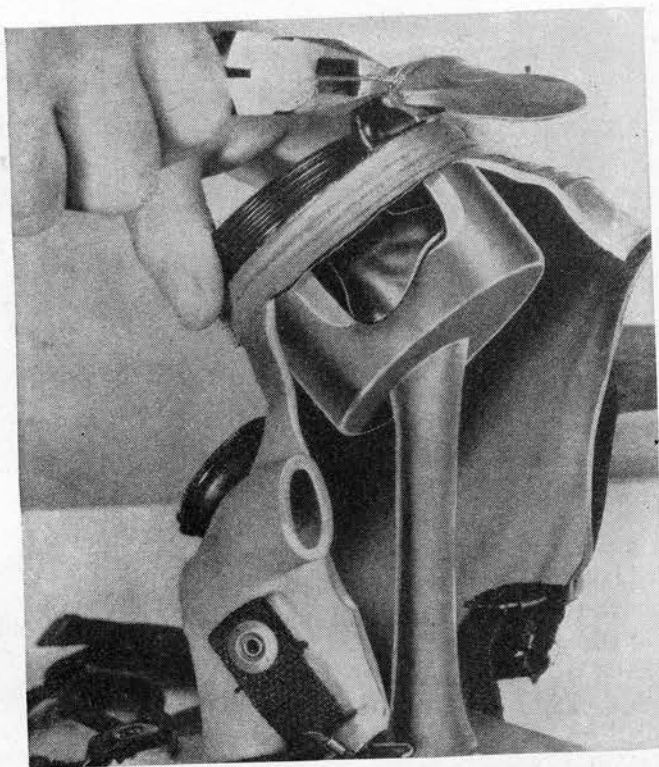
Replacing outlet valve on M1 optical facepiece.
